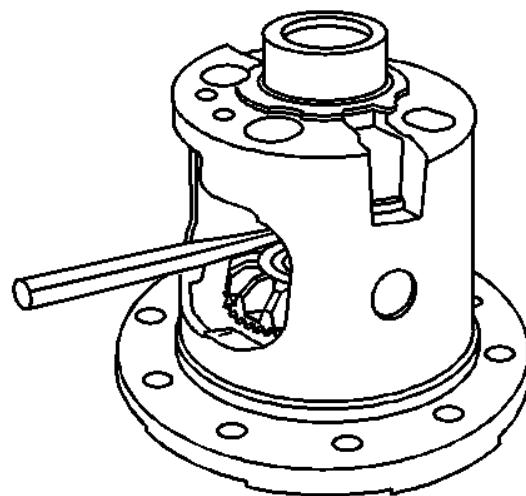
Installing Brass Drift Between Locking Differential Side Gear & Pinion Shaft
